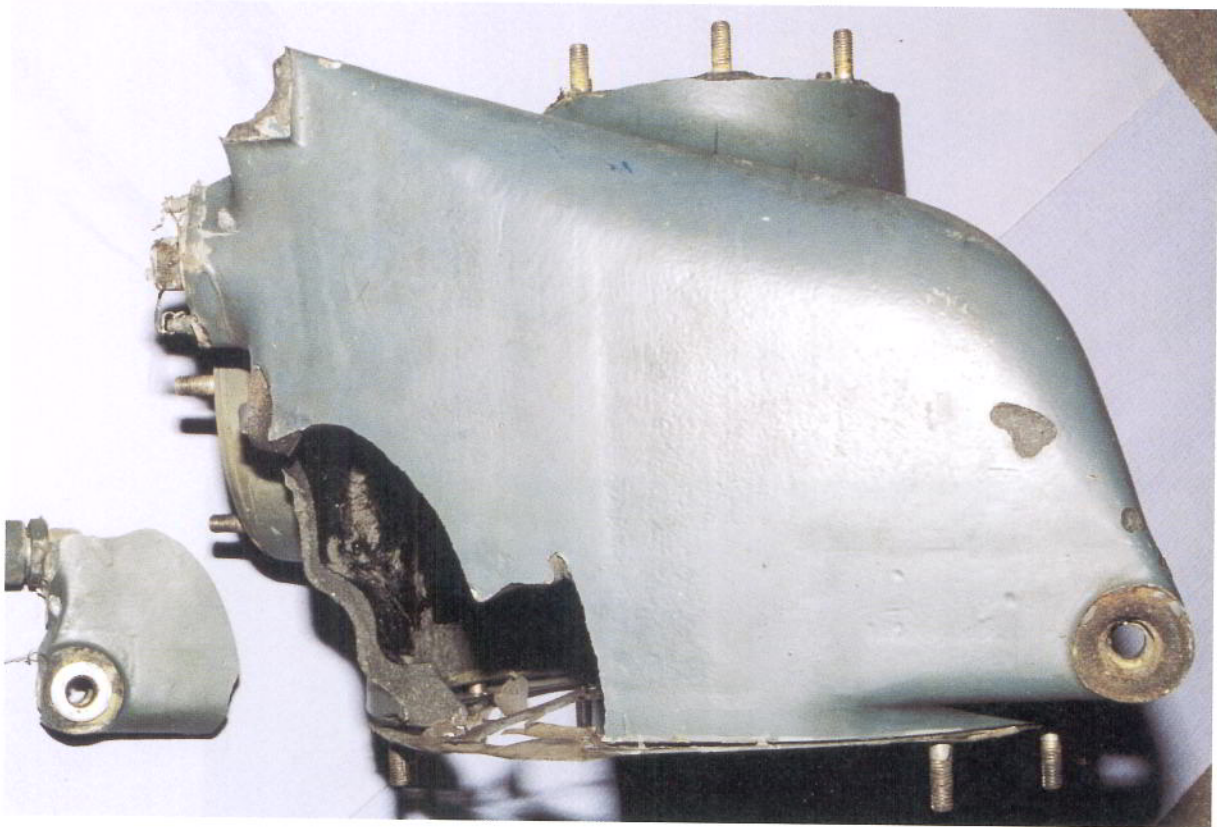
Showing failed lower attachments of gearbox (left attachment is upper one in this photograph, right is lower).
